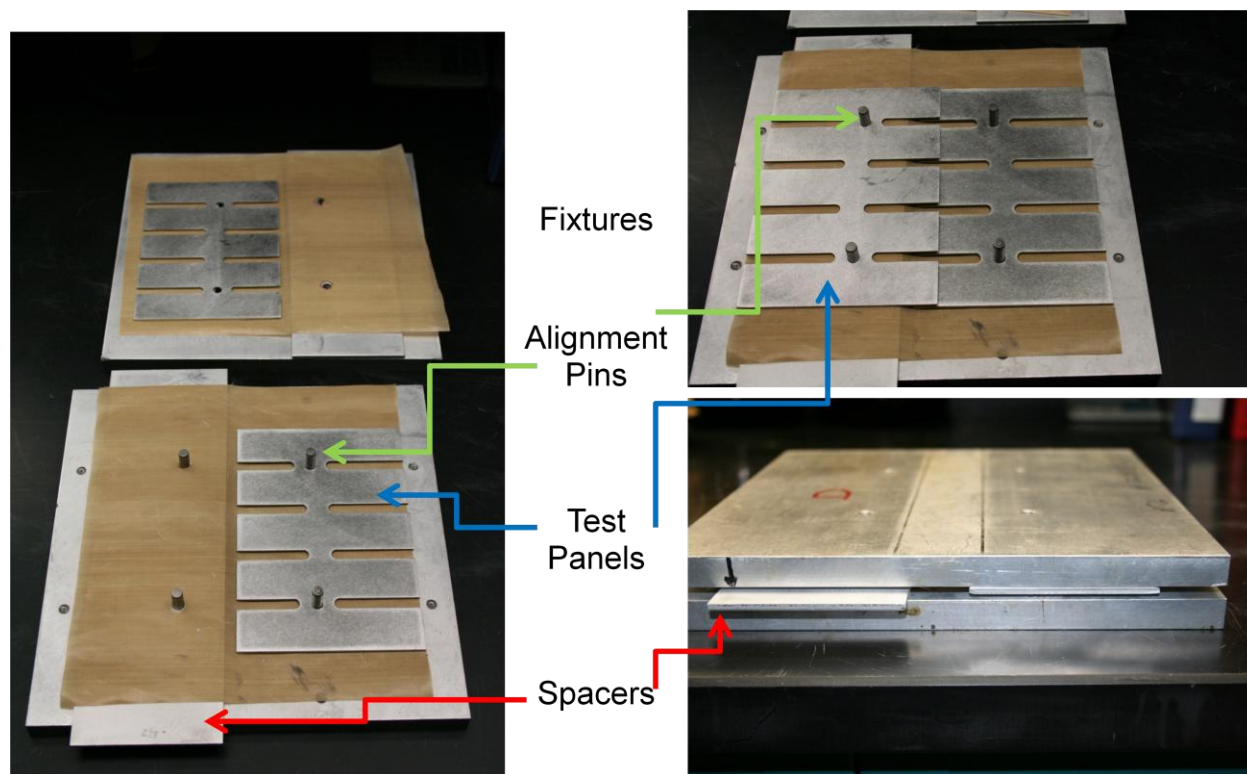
Custom tooling fixture and ASTM D1002 aluminum coupon templates prior to adhesive bonding. Individual single-lap-joints were cut from bonded coupon assembly after cure.
